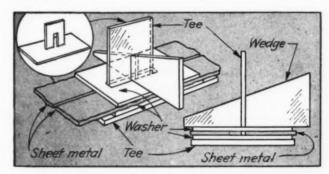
The wedge-shaped H-clamp, or double-L clamp is simple, inexpensive and easy to make from scrap material.
